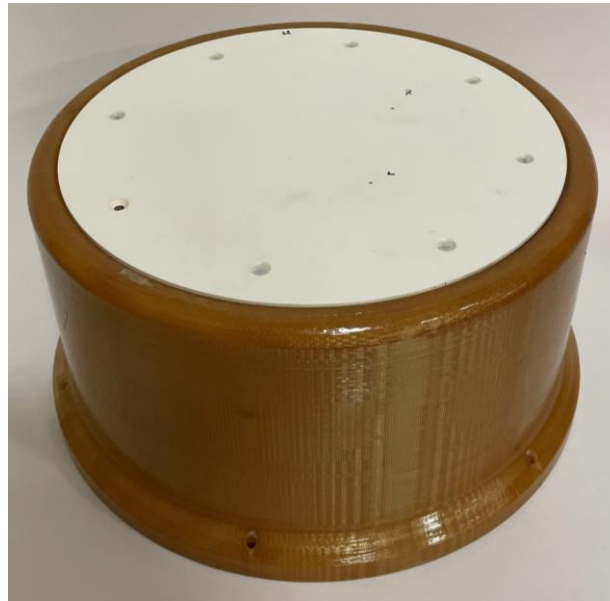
UHF Patch Antenna assembled on the bottom side of the puck housing
